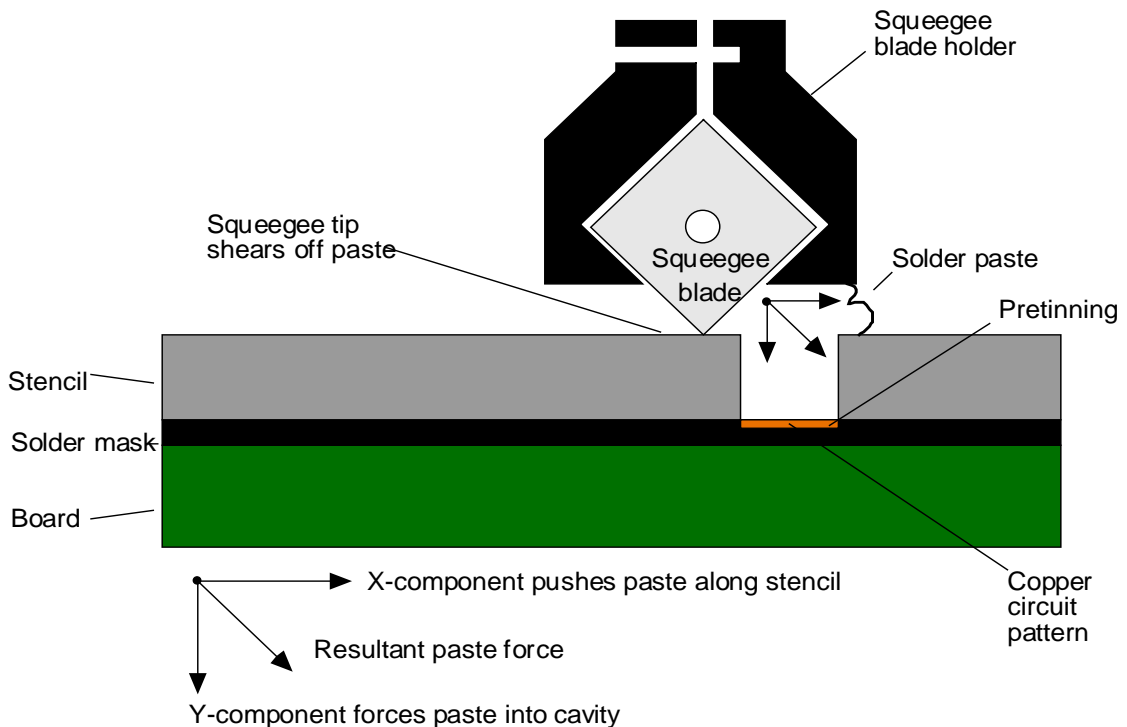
Schematic of paste printing using stencil for reflow soldering [4]
